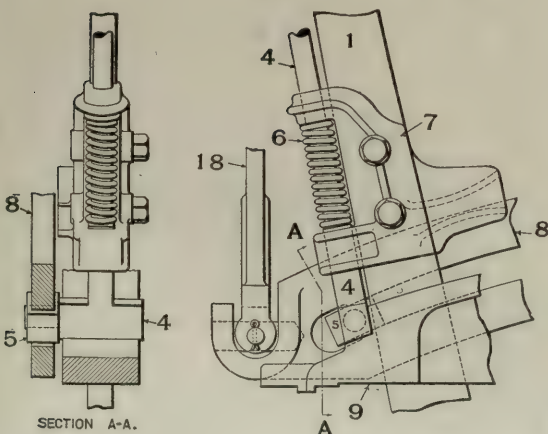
and 846-850 illustrate a Saxby & Farmer interlocking machine assembled. Figs. 794-845 show various details of the machine. In the following description the numbers refer to Figs. 790-794. The latch handle 2 is pivoted on the lever 1 and is connected to the latch rod thimble 3. This, therefore, imparts motion, when operated, to the latch rod 4
